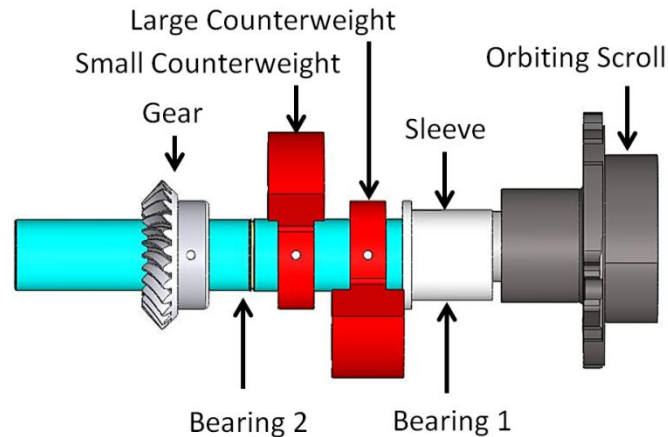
Shaft assembly sent to OTS Wire for balancing.
